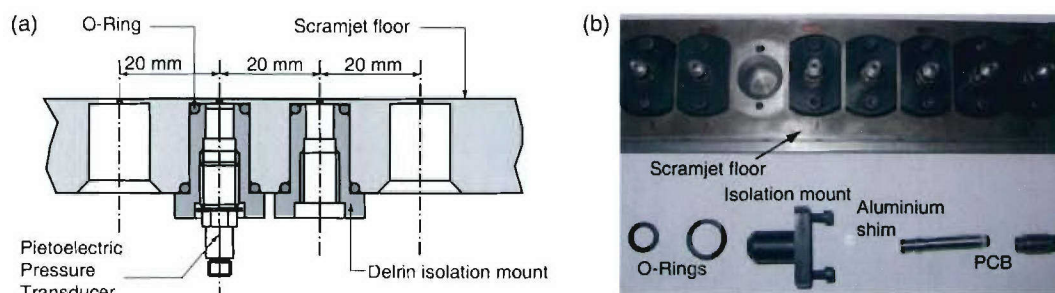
Details of the pressure transducer mounts: (a) schematic drawing (taken from (Gaston 2002)), (b) photograph of the disassembled transducer
